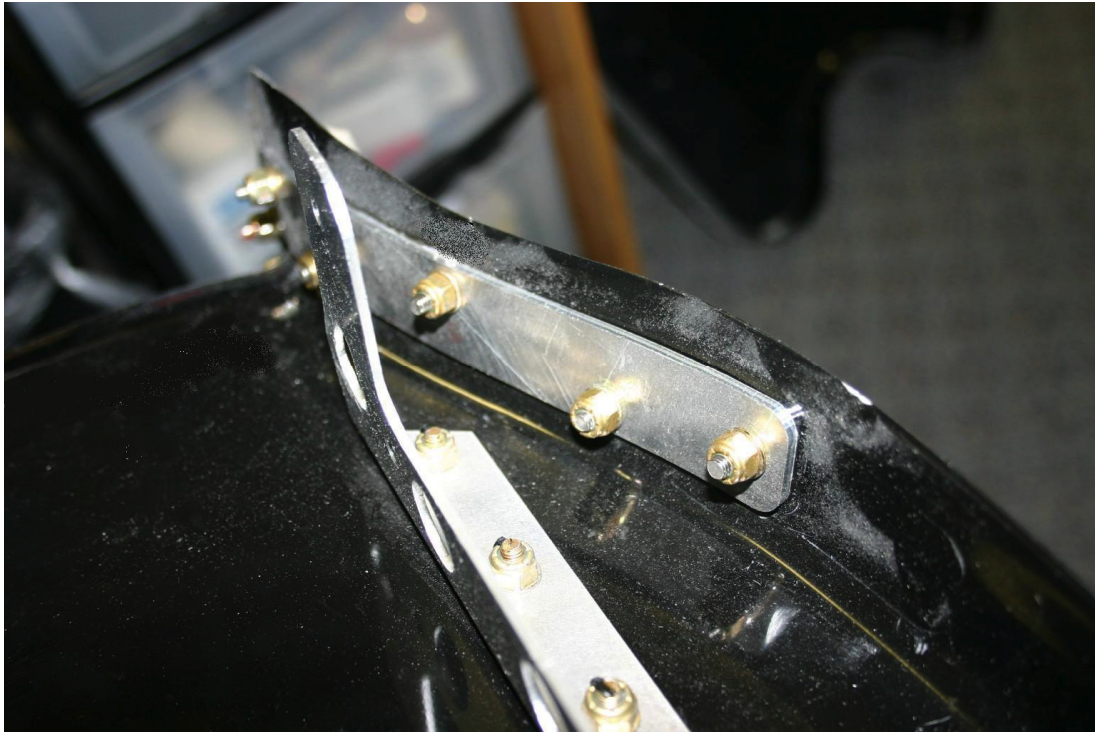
COMPLETED INSTALLATION ON SEAT BOTTOM NEAR BRACKET
